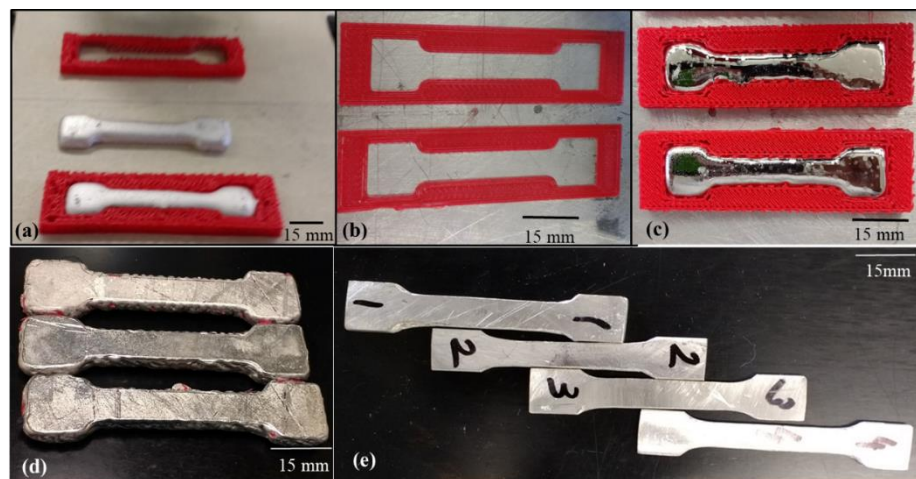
(a) Process summary of the FFF cast methodology (b) Tensile molds 3D printed using PLA (c) Molten material cast onto the 3D printed mold (d) As-cast tensile specimens (e) Post-processed tensile specimens
